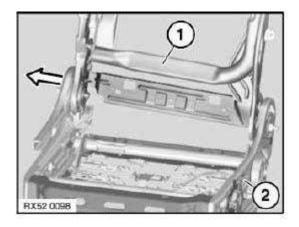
Removing Backrest Frame From Seat Mechanism Courtesy of BMW OF NORTH AMERICA, INC.
